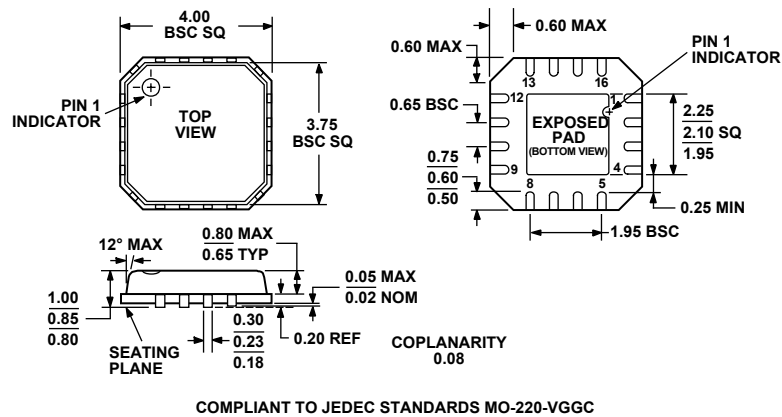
16-Lead Lead Frame Chip Scale Package [VQ_LFCSP] 4 mm × 4 mm Body, Very Thin Quad (CP-16-4)
